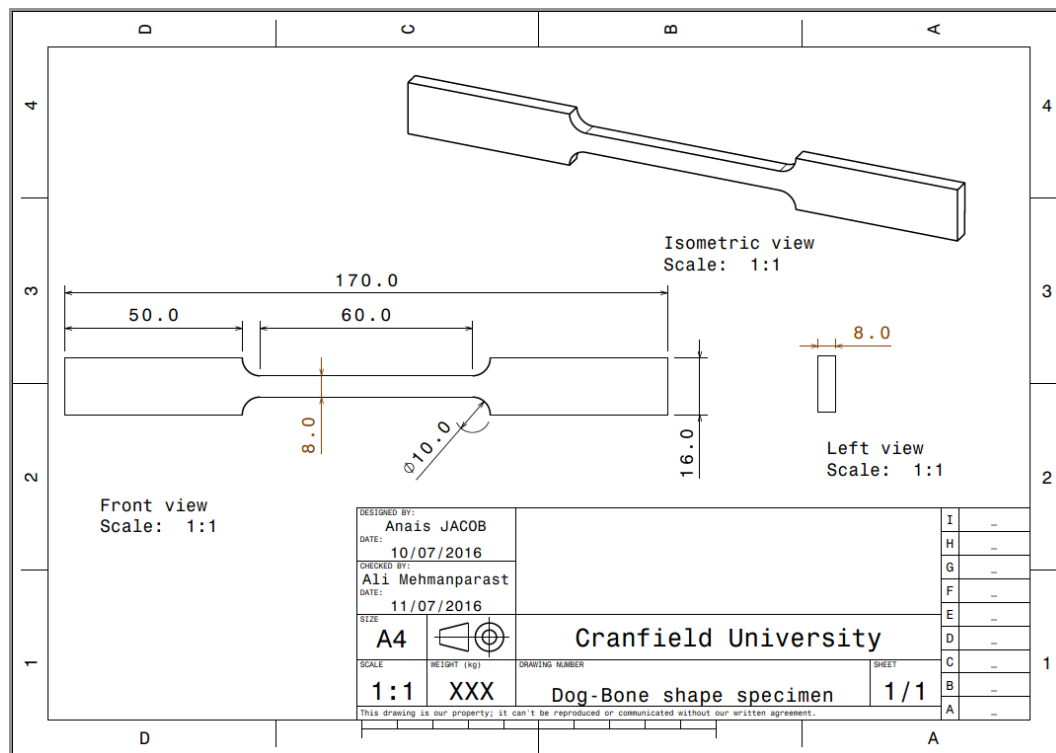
Technical drawing of the dog-bone shape tensile test specimen
